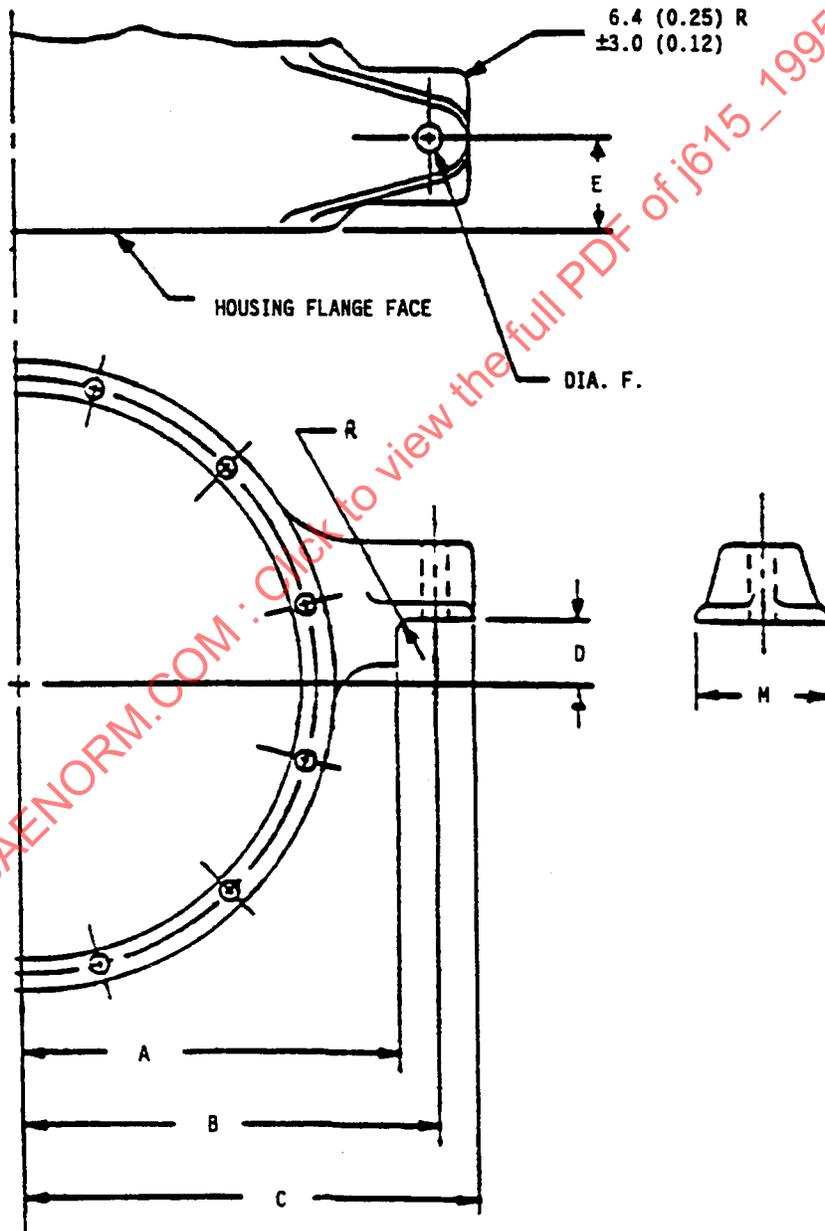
ARM TYPE MOUNTING DIMENSIONS
